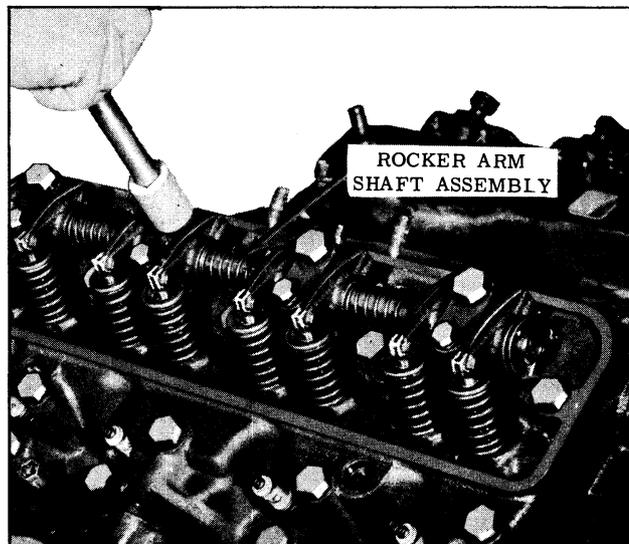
Removing Rocker Arm Shaft Assembly
